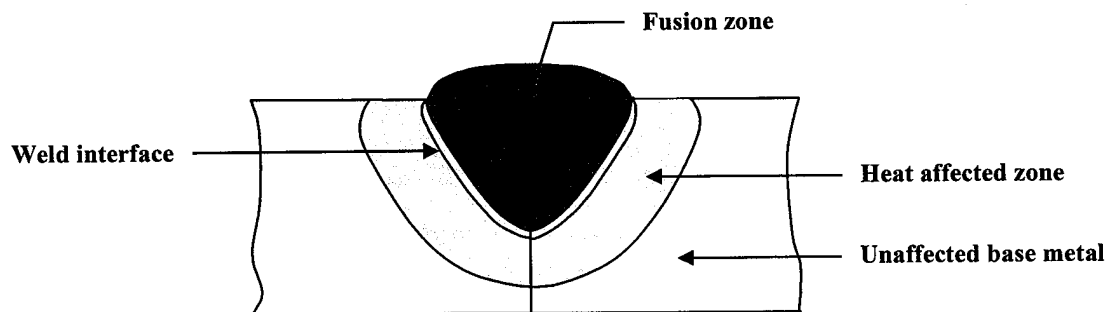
Schematic presentations of several zones in a fusion welded joints (Sacks & Bohnart, 2005).
